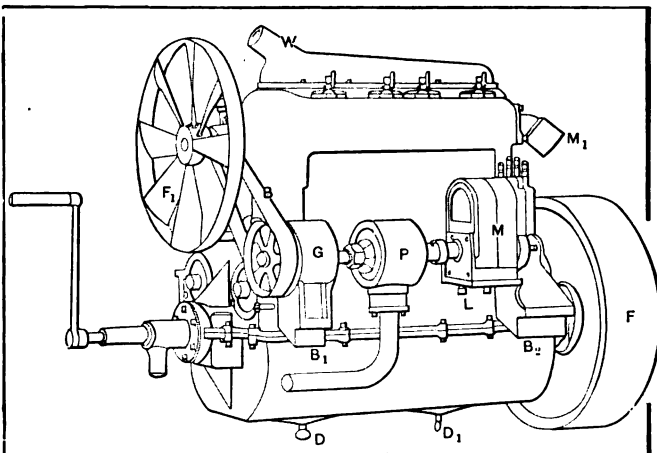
Left-hand view of the motor, showing the arrangement of the magneto, pump and fan drive, together with the integral cast exhaust manifold
